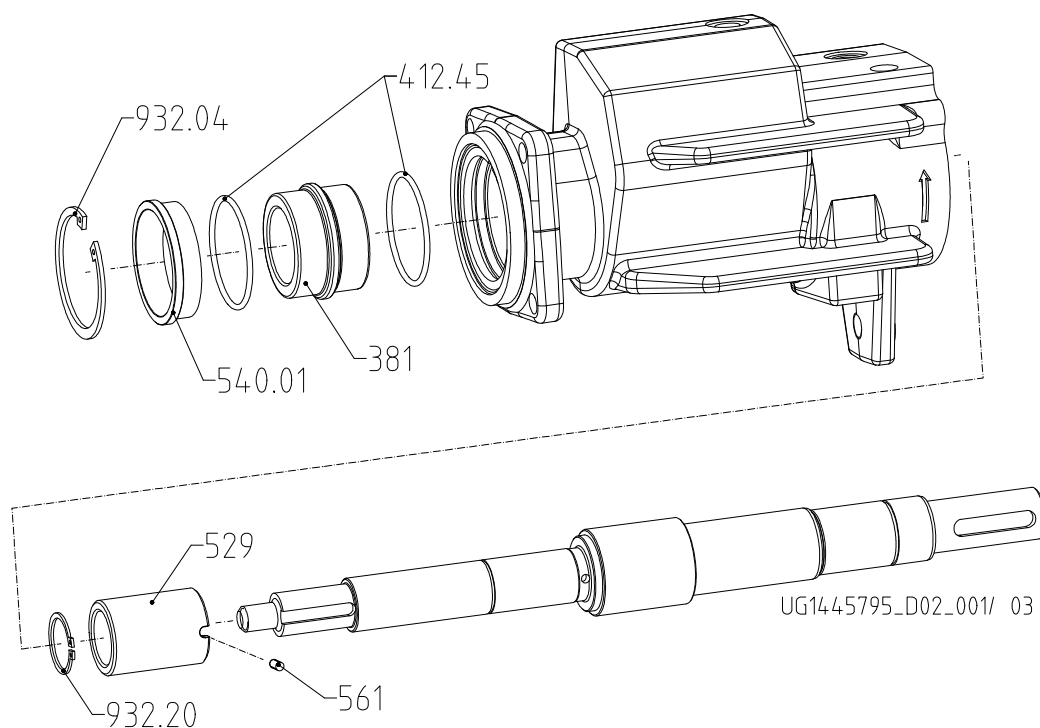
Exploded view of Etanorm SYT, bearing brackets WS_25_LS / WS_55_LS with SiC plain bearing
